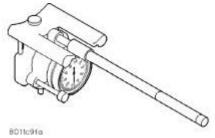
CYLINDER INDICATOR - C-119 Courtesy of CHRYSLER LLC
